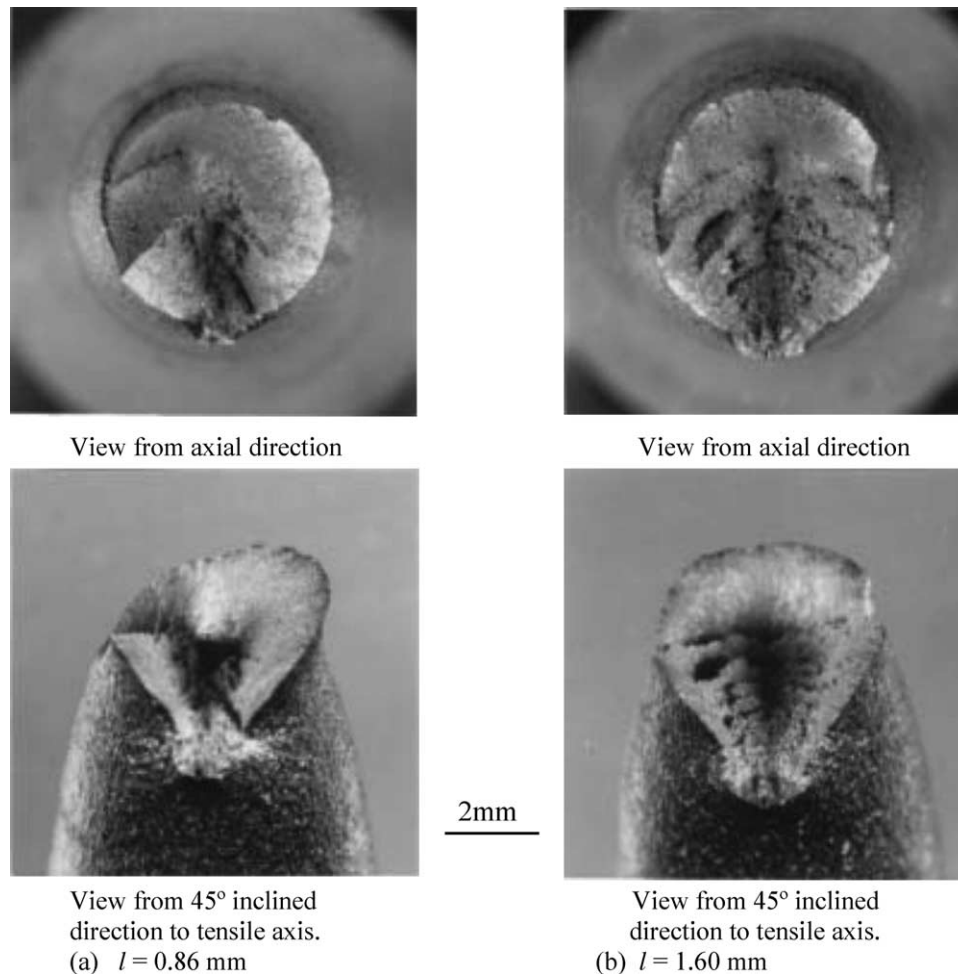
Shear mode fracture in holed specimens ( $\Delta\epsilon_p = 0.0254$ ).
